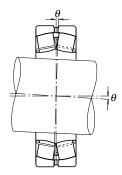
Permissible Misalignment of Spherical Roller Bearings
